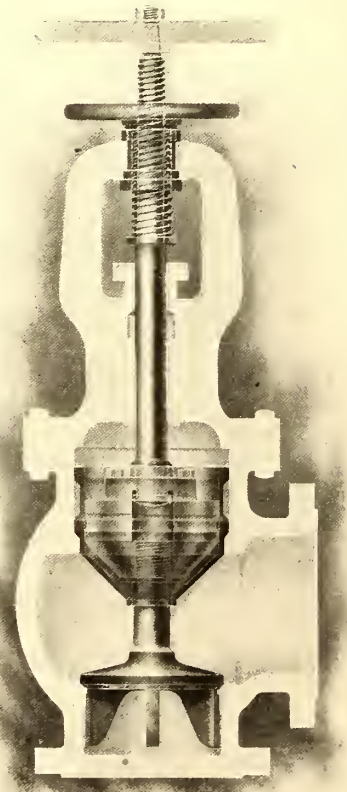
CUSHIONED NON-RETURN VALVE WITH AUXILIARY HAND WHEEL
